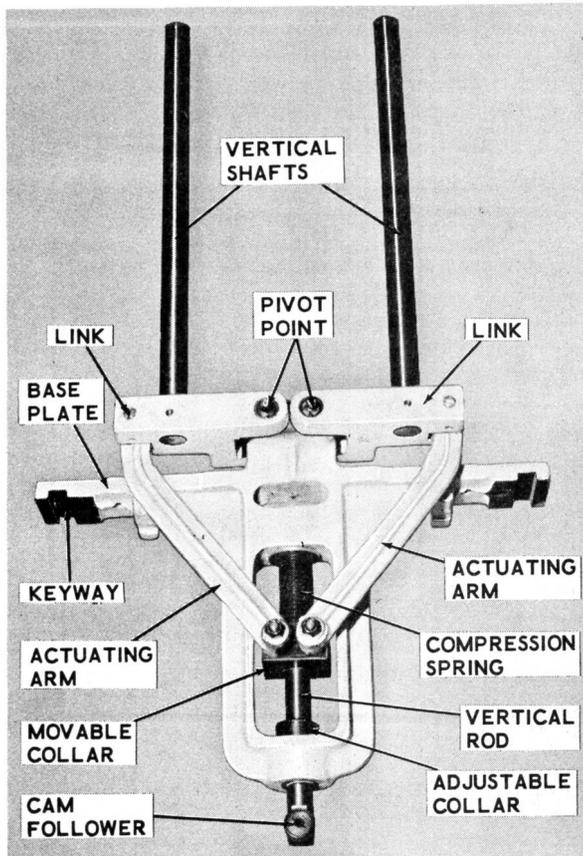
Air Jet Splitter Blade Double Rod Pivoted Assembly
